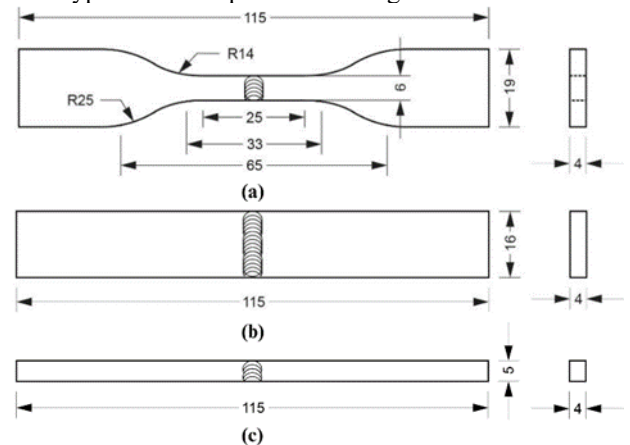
Specimen (a) Tensile Test (b) Bending Test
